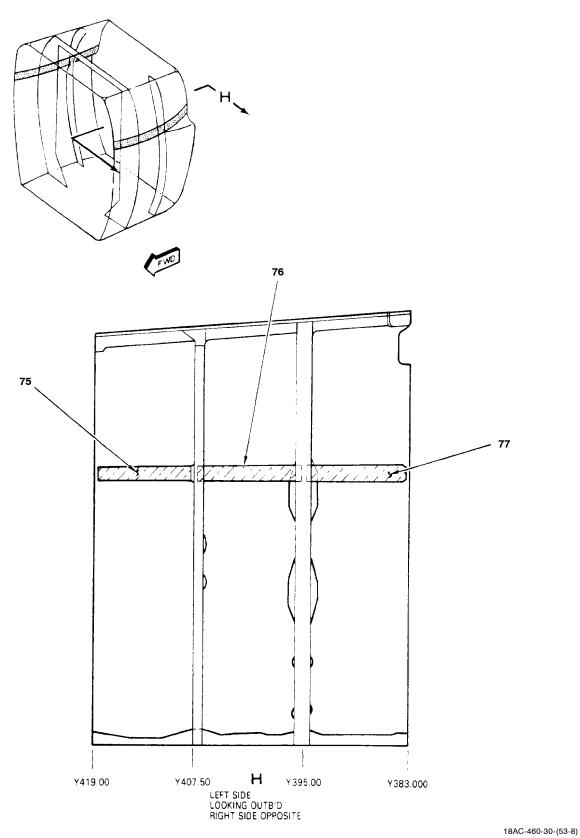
No. 2 Fuel Tank Cavity Foam Filler - 161353 THRU 161741 (Sheet 8)
